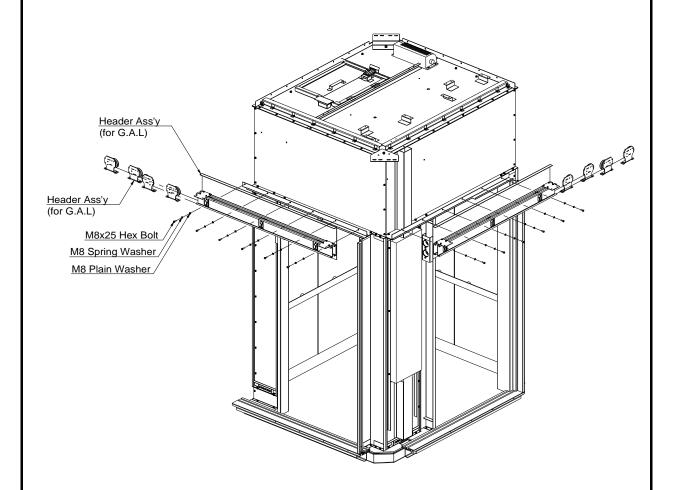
INSTALLATION CAR HEADER (CORNER POST)
